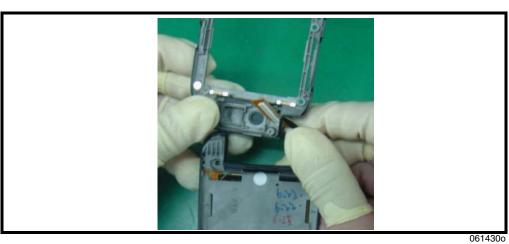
Removing the Flex Cable from the Flip Hinge Assembly
